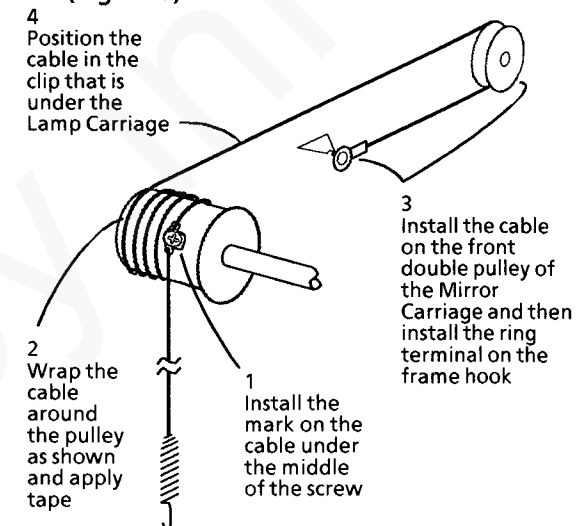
Installing the Front Scan Cable on the Front Drive Pulley
